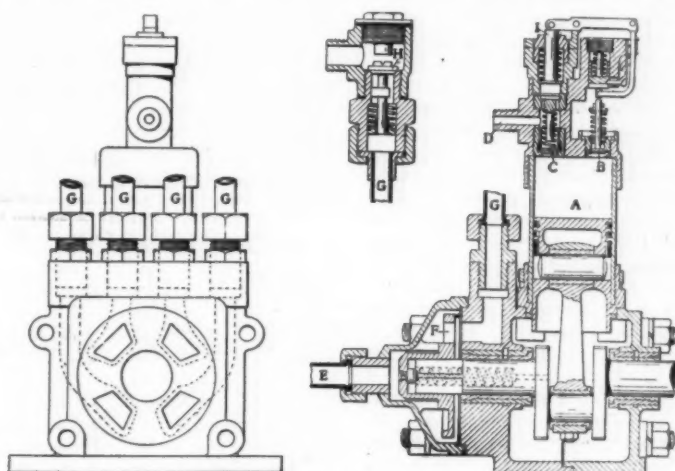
DETAILED VIEW OF LE TOMBE SELF-STARTER.
